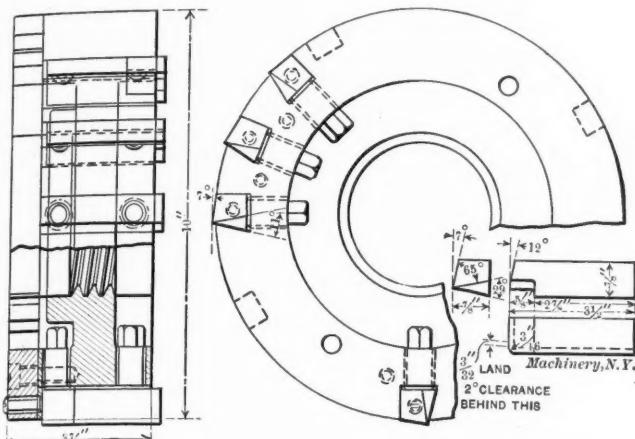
Ten-Inch, 16-blade Cutter used in Experiments on Milling Cutters.
